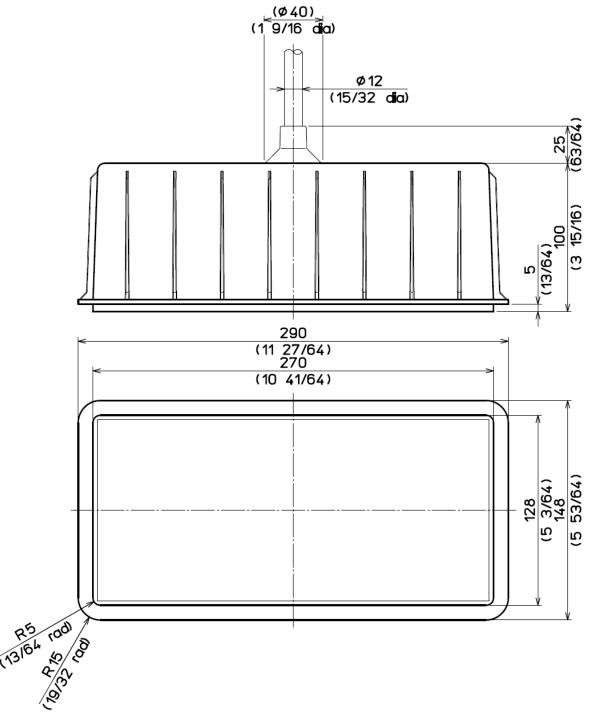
Outline dimensions of a transducer (TD380-K)
